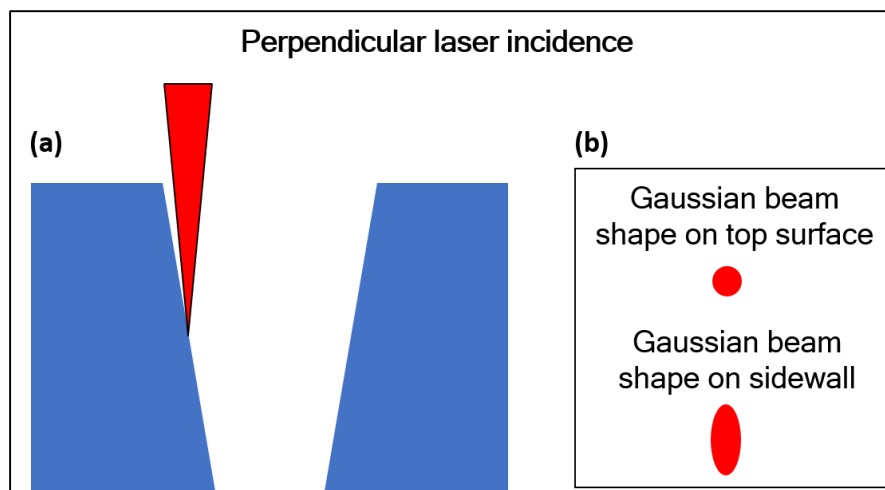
(a) Schematic illustration of perpendicular laser incidence on the workpiece and (b) laser beam profile during the drilling process.
